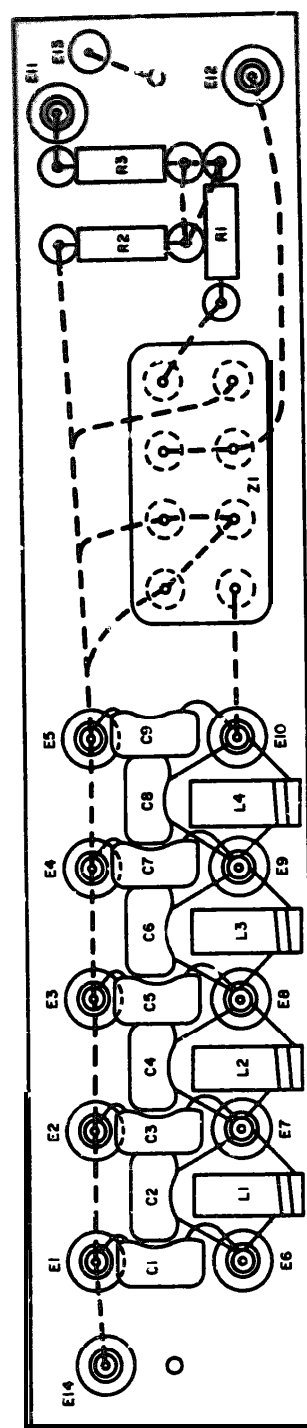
Line filter A22A19A4, wiring diagram and parts location
